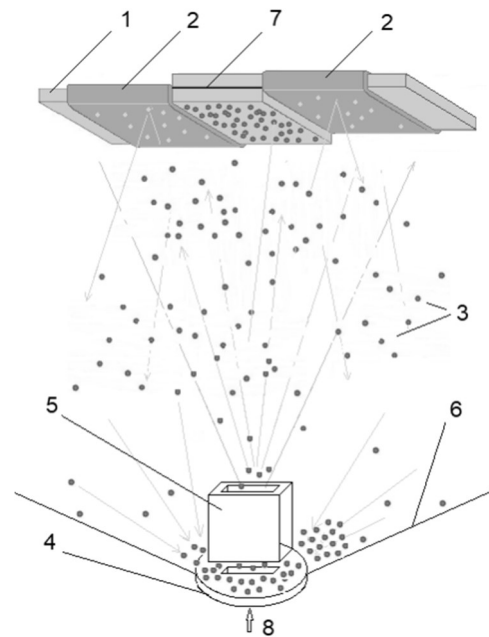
Illustration of the shot peening process: 1 – specimen, 2 – cover, 3 – steel balls, 4 – compressed air nozzle, 5 – de Laval nozzle, 6 – bottom of the working chamber, 7 – adhesive, 8 – compressed air supply [17]
